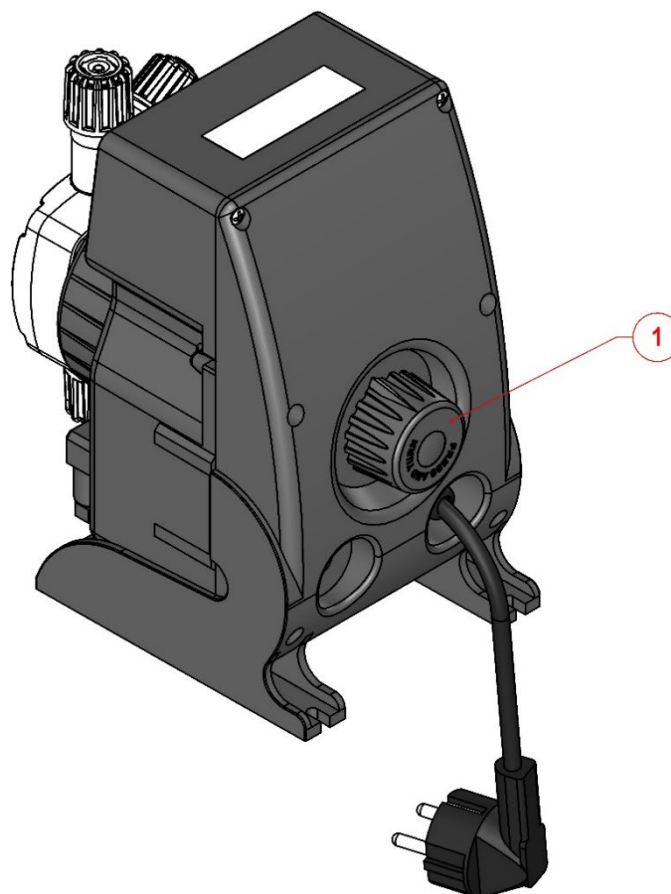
PBM pump, detail of stroke adjustment knob.
